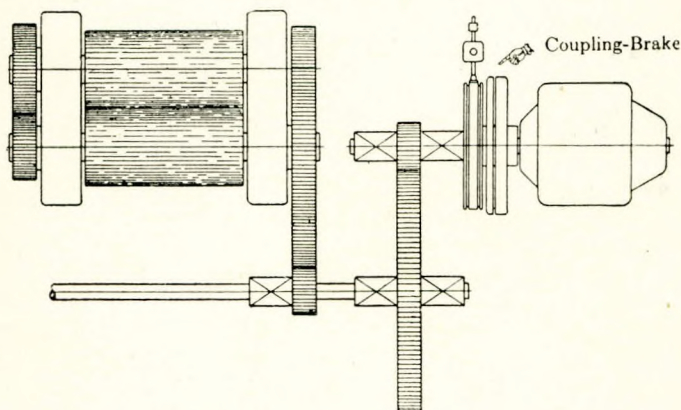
Typical Rubber Mill Drive with Magnetic Clutch Brake.
